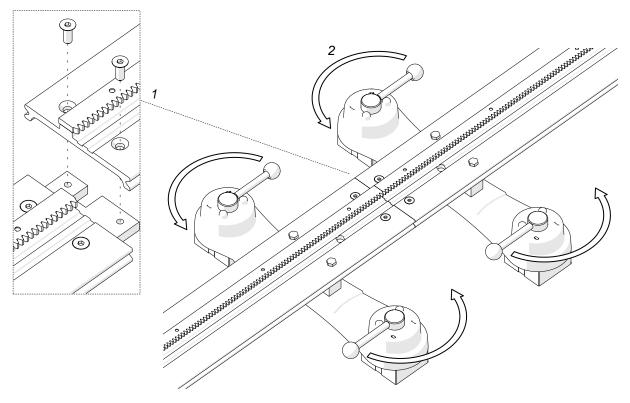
Interconnecting the rails and clamping the magnetic units to the surface
